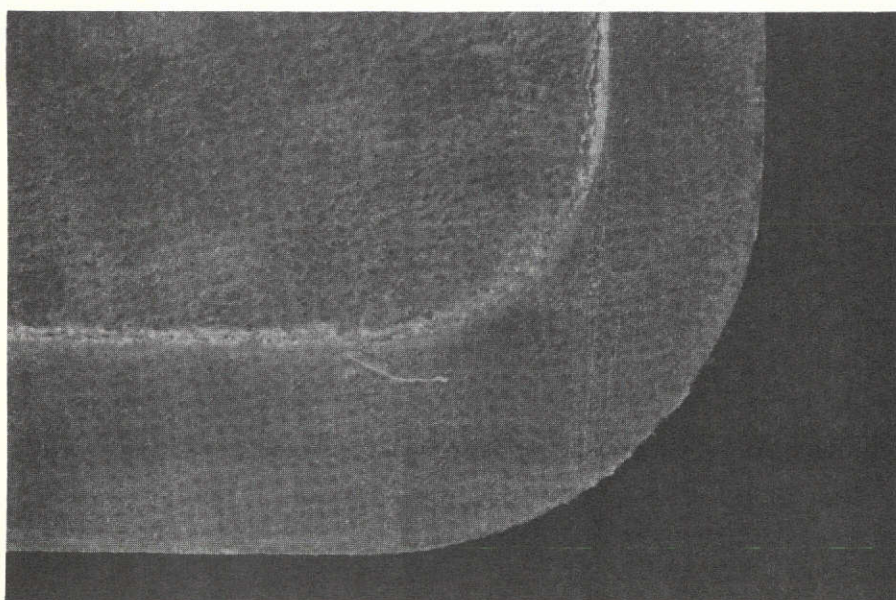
Type A Positive Plate - Coined and Die-Cut Corner
